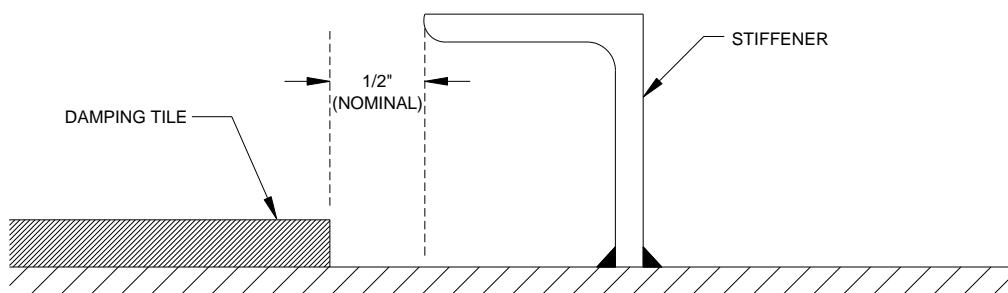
Installation of damping around stiffeners in submarine superstructure and fairwater areas (not to scale).
